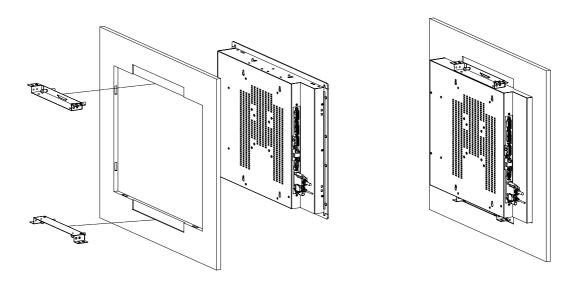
Panel Mounting (447.2 x 329.2mm)
